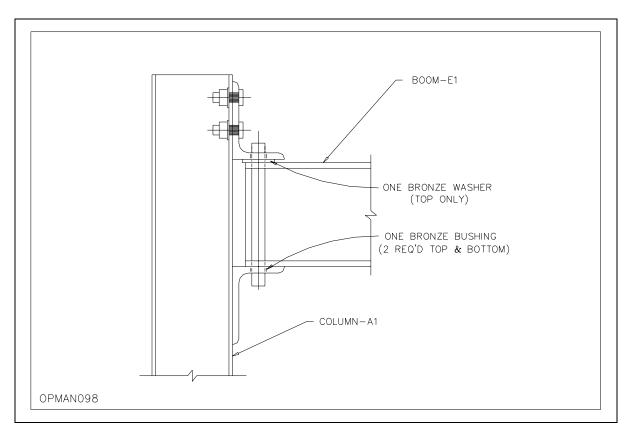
29: Jib Boom: Bronze Bushing and Washer Locations
